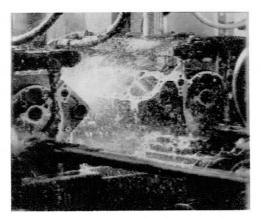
A Flood of Cutting Fluid Is Applied On the Workpiece
